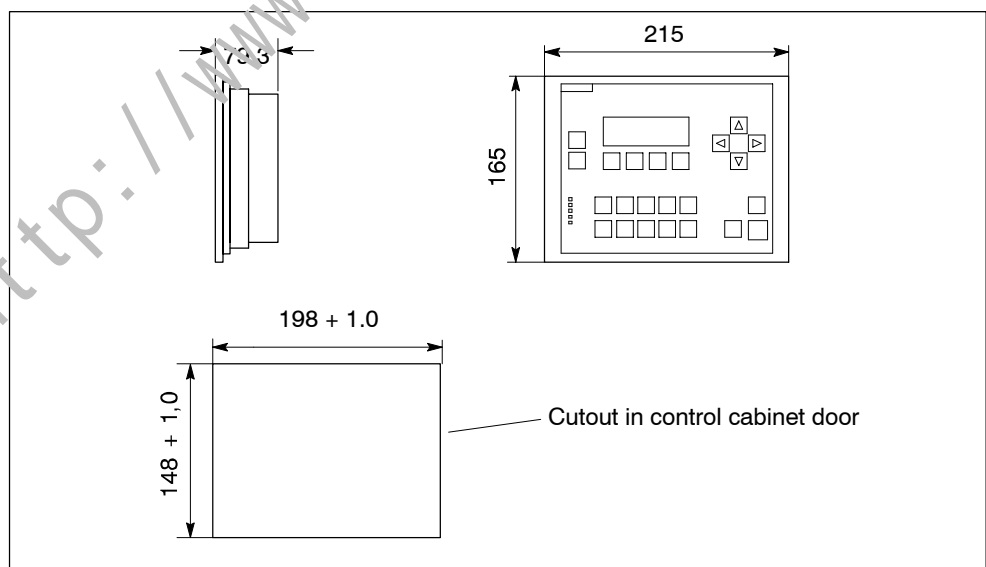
Dimension Diagrams for the C7-613 (Dimensions in mm)
